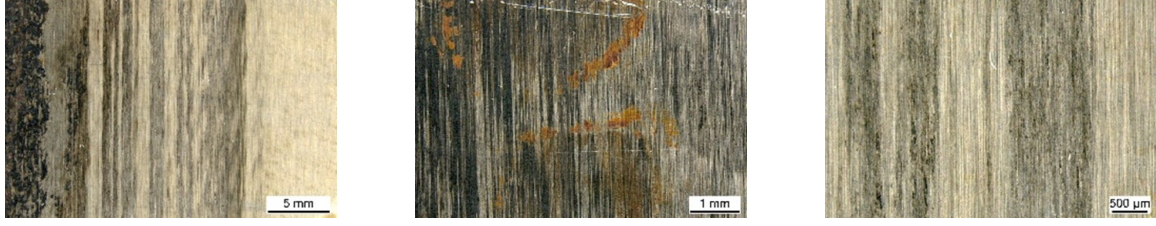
Corroded zone 2, CBK2 zone, in the back side of the corroded bearing.
